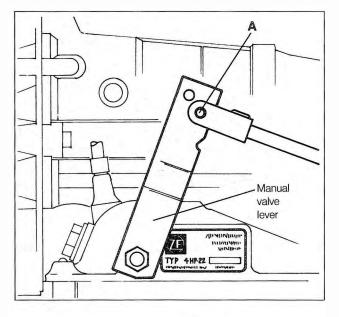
Manual lever for 3 HP 22 transmissions. Selector rod should be installed in hole A.
